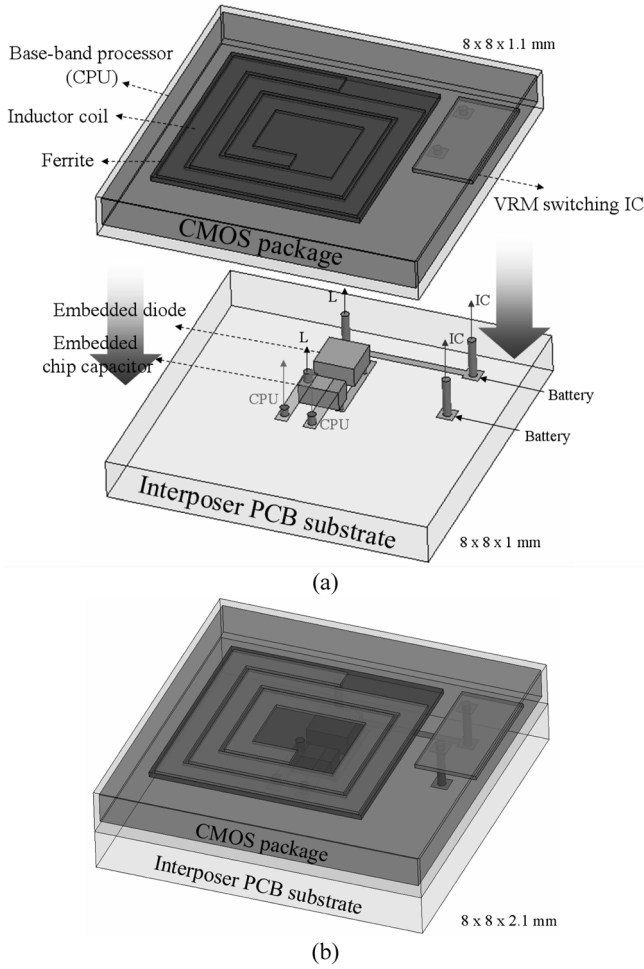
Proposed one-chip power module; (a) CMOS package and interposer PCB substrate, and (b) assembled module.
